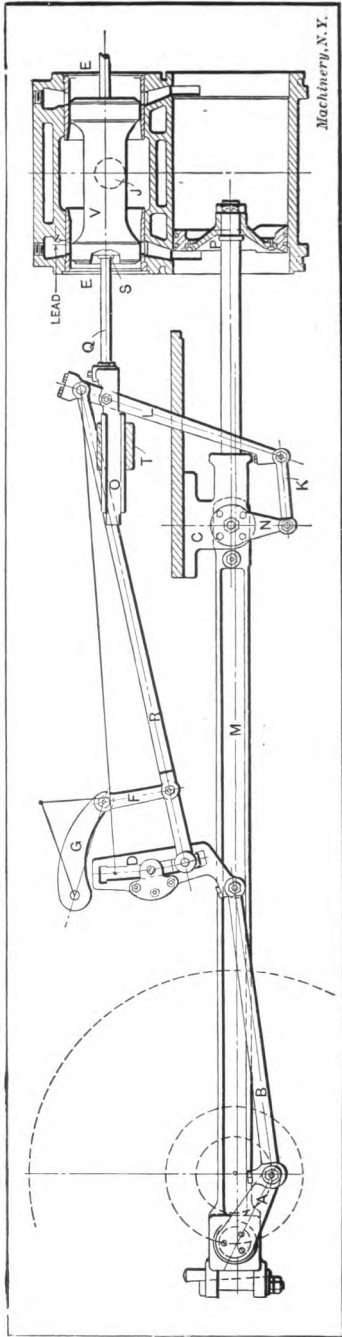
Walschaerts Valve Gear with Engine on Dead Center, showing Function of Lead-lever L
